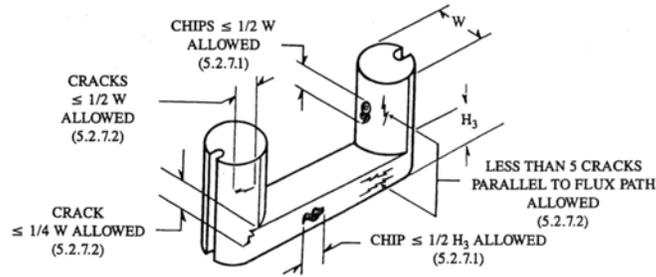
CHIPS & CRACKS NON-MATING SURFACES
